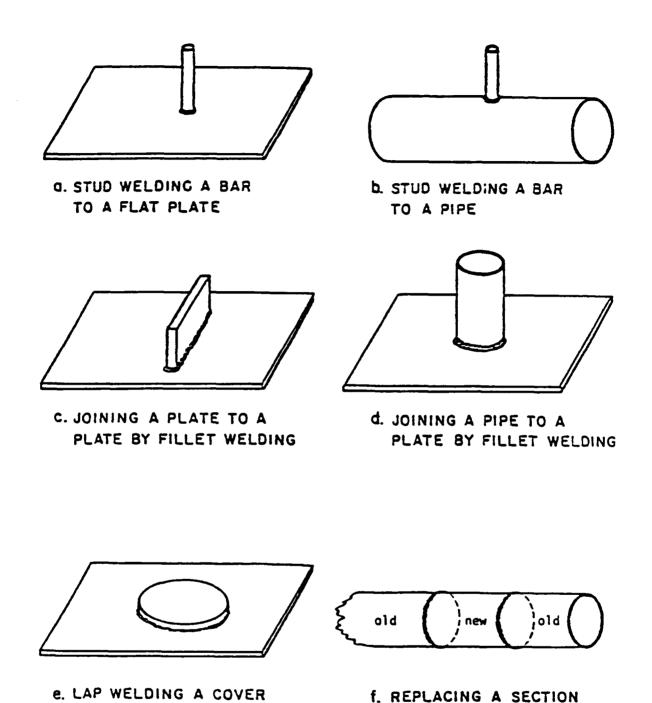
Some joint types for instamatic welding systems [57]
